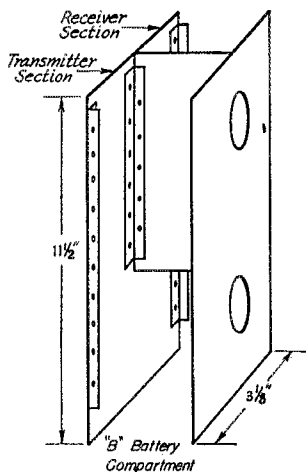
Detail drawing of the "H"-shaped chassis for the 10-meter handie-talkie.
